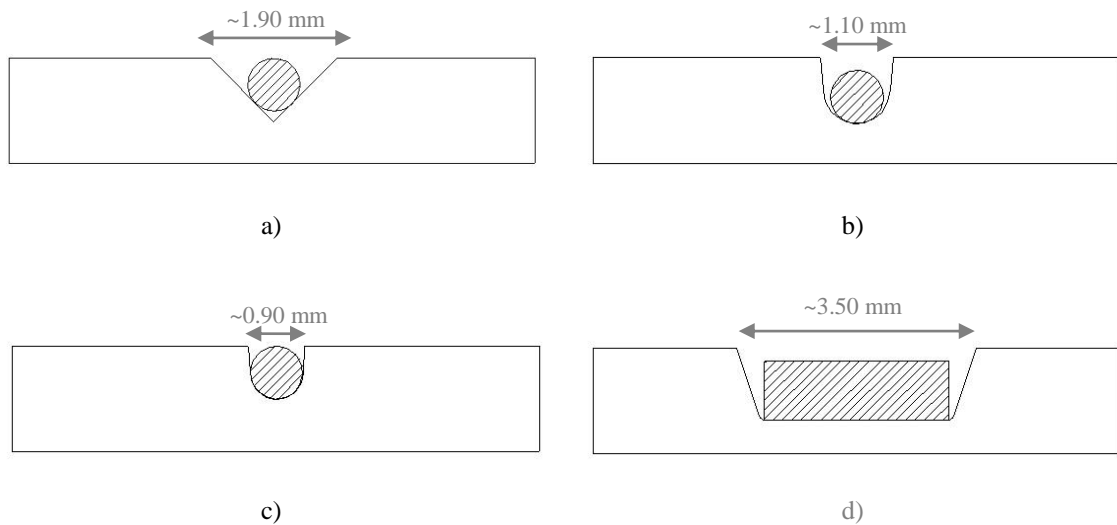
Cross sections of base plate with metallic reinforcements before FSW. a) “V” type cross section shape groove, b) round cross section shape, opened with a 1,0 mm diameter steel wire, c) round cross section shape, opened with a 0,8 mm diameter steel wire, d) rectangular 1,1 x 3,5 mm cross section.
